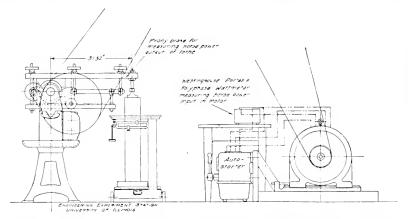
Arrangement of Apparatus for Measuring Power Absorbed by Friction in the Lathe, Countershaft and Belting
